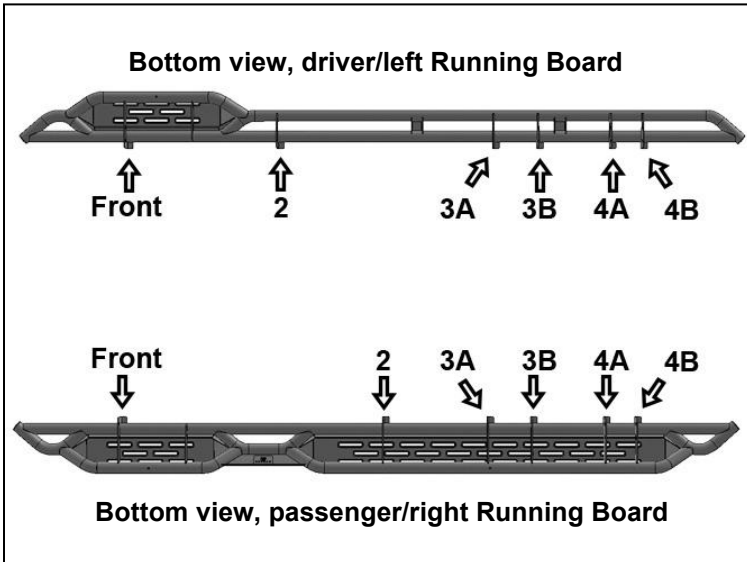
Attach driver/left front Brackets to front facing side of mounting tab on driver/left Running Board
